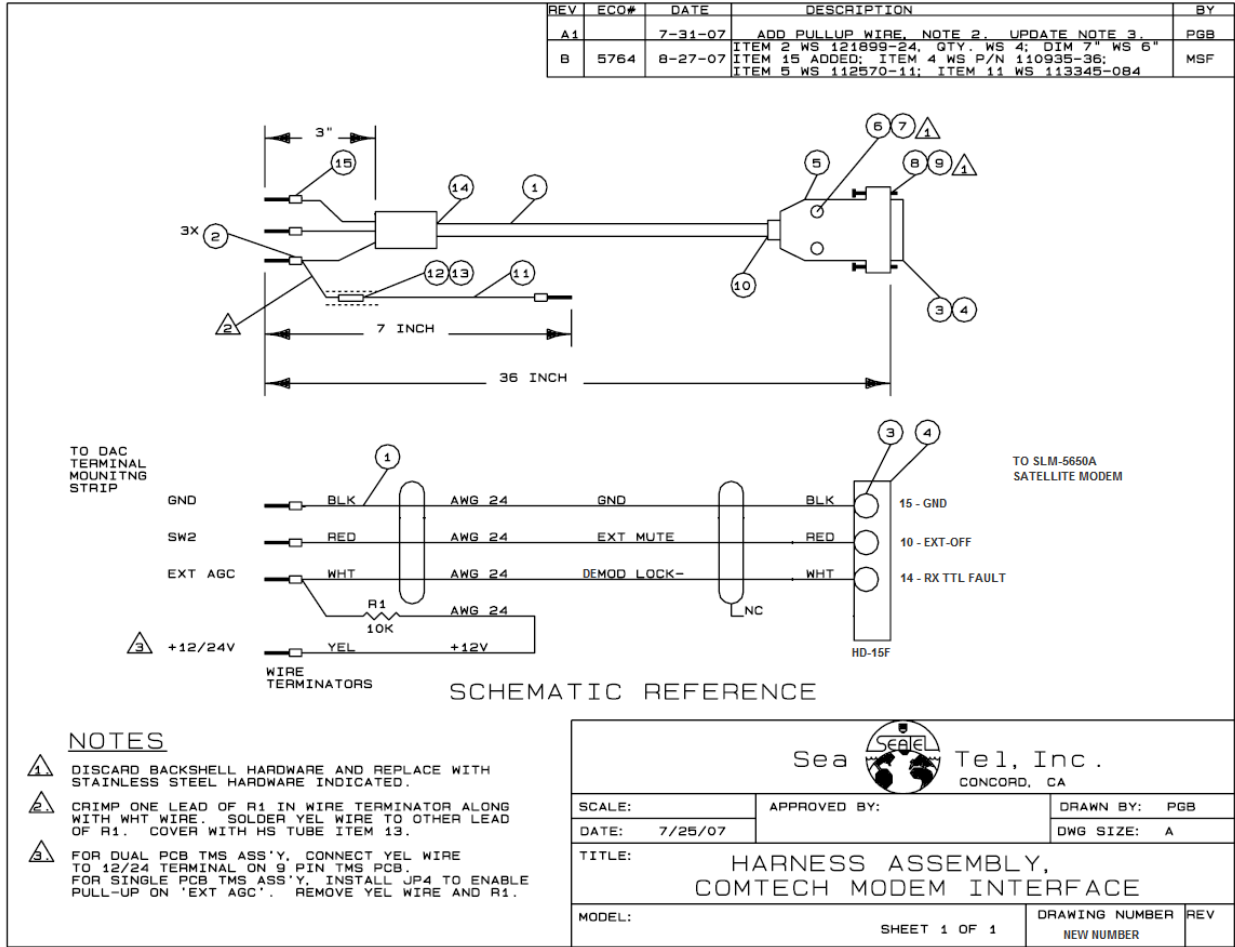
, Comtech 5650A Modem Interface Cable Assembly
